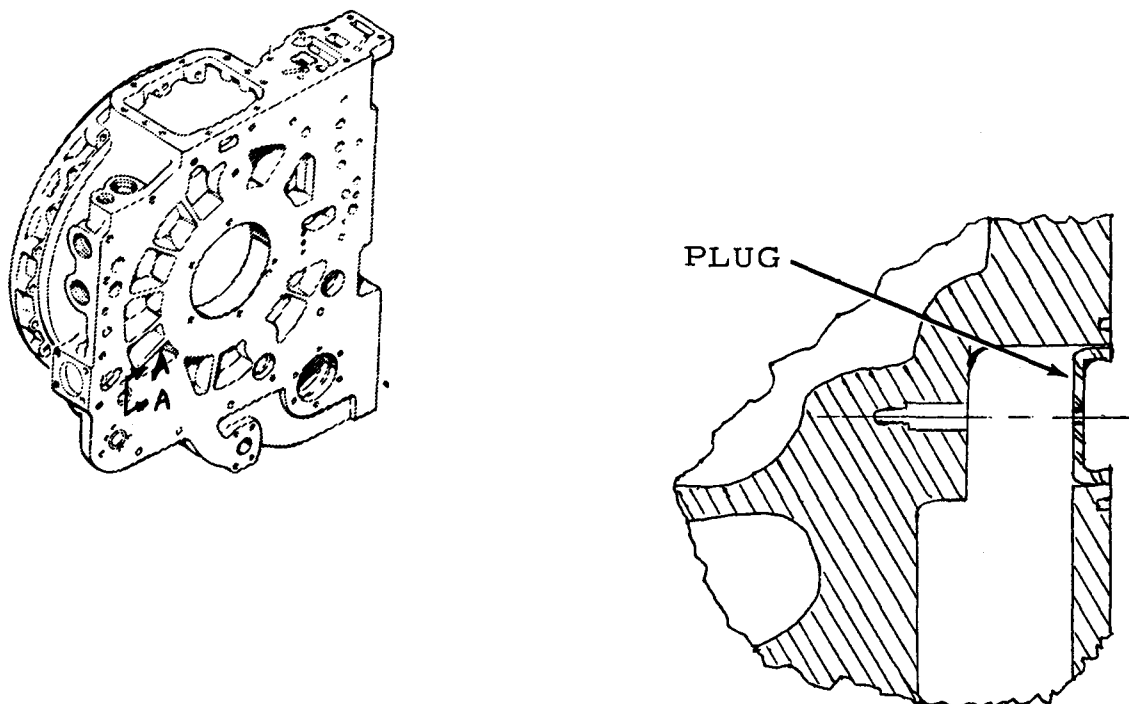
ORIFICE PLUG INSTALLED IN CONV. HOUSING. (REPLACES THE CHECK VALVE COMPONENTS AT THIS PORT ON NON-OUTPUT OIL PUMP TRANSMISSION ASSEMBLIES.)
